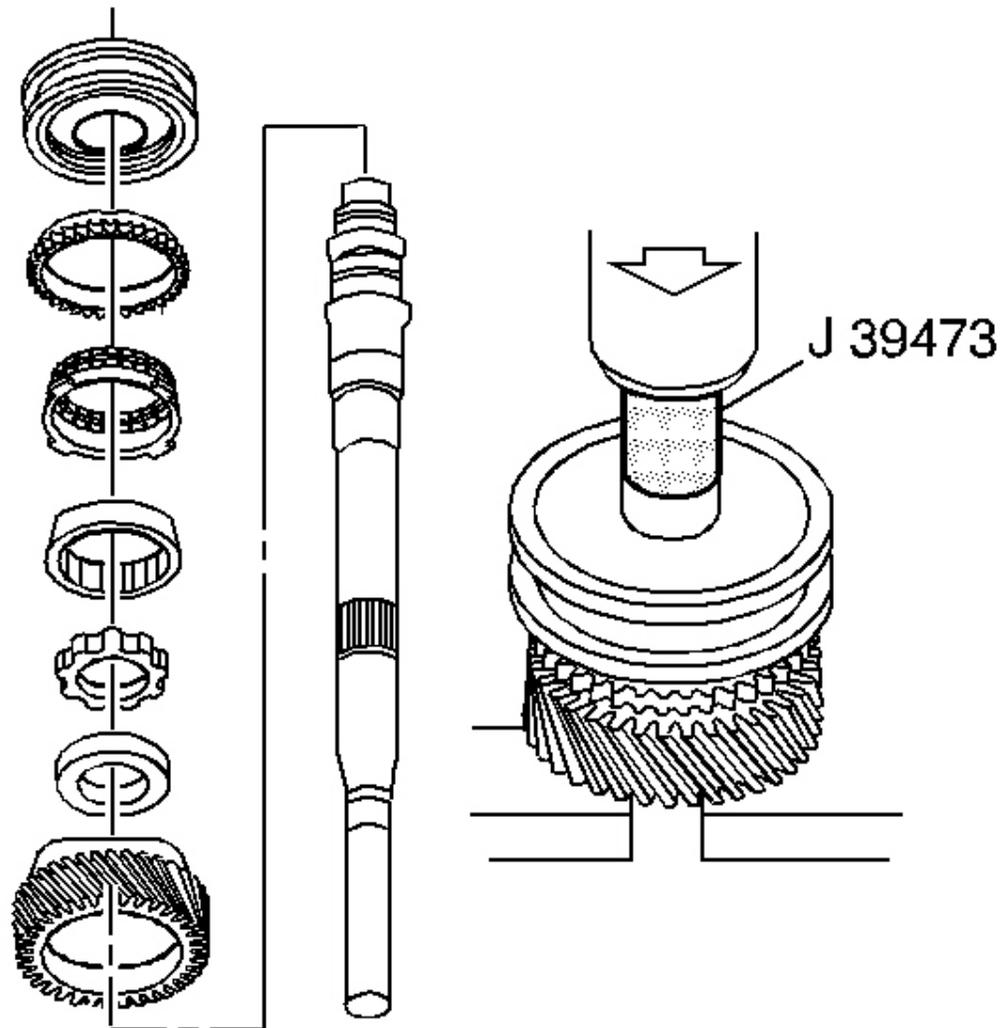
Identifying 3rd/4th Speed Synchronizer Assembly, Blocking Ring, Cones, Washer & Spacer
